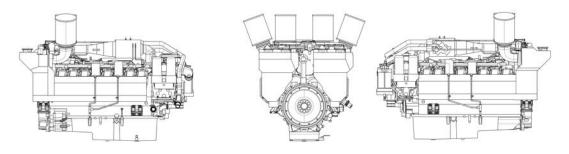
W16V14 Engine outline drawing (DAAF460820D)
